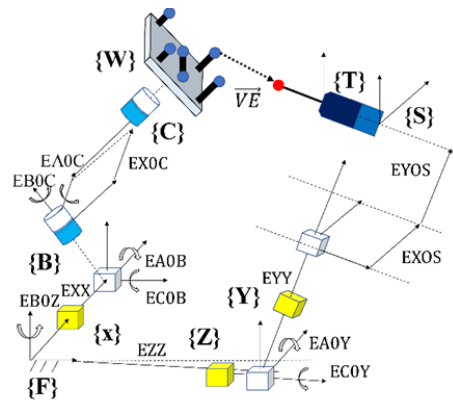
Illustration of the modelled geometric errors of the experimental five-axis machine tool with WCBXFZYST topology, where a touch trigger probe is installed on the spindle and some master ball artefacts are mounted on the machine workpiece table
